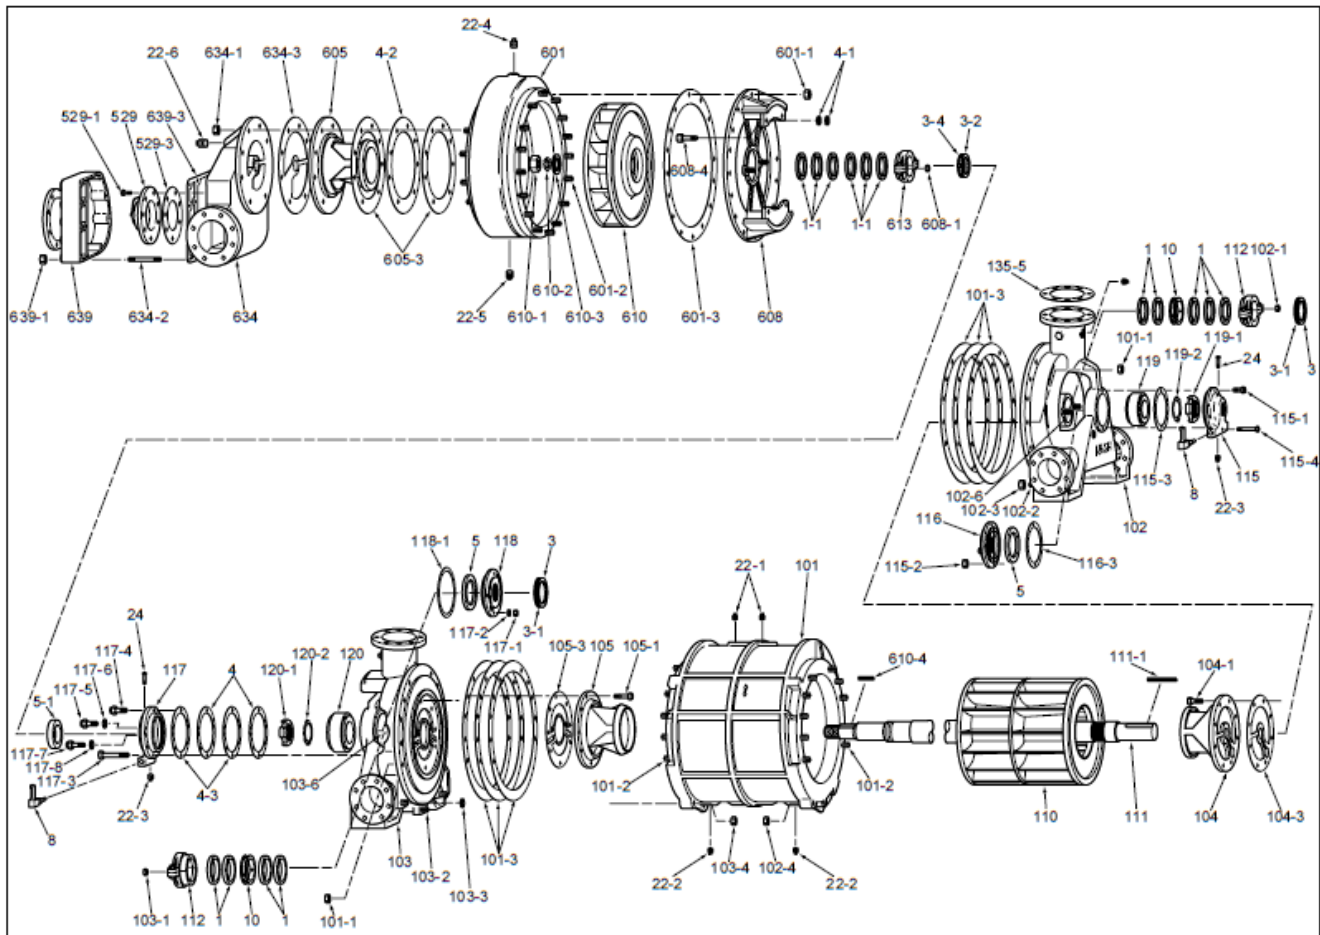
Exploded View of NES Two Stage Vacuum Pumps
